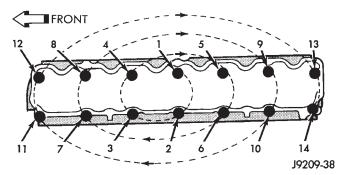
Engine Cylinder Head Bolt Tightening Sequence
